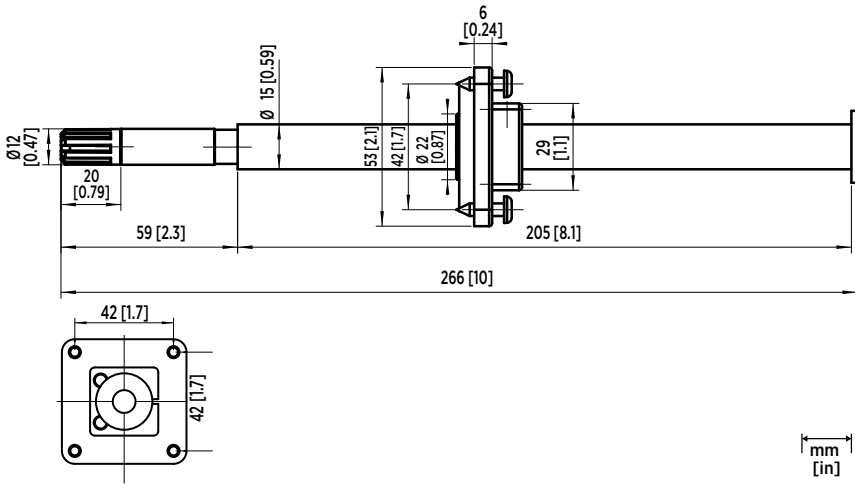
Dimensions of HMP110 Probe with Duct Installation Kit
